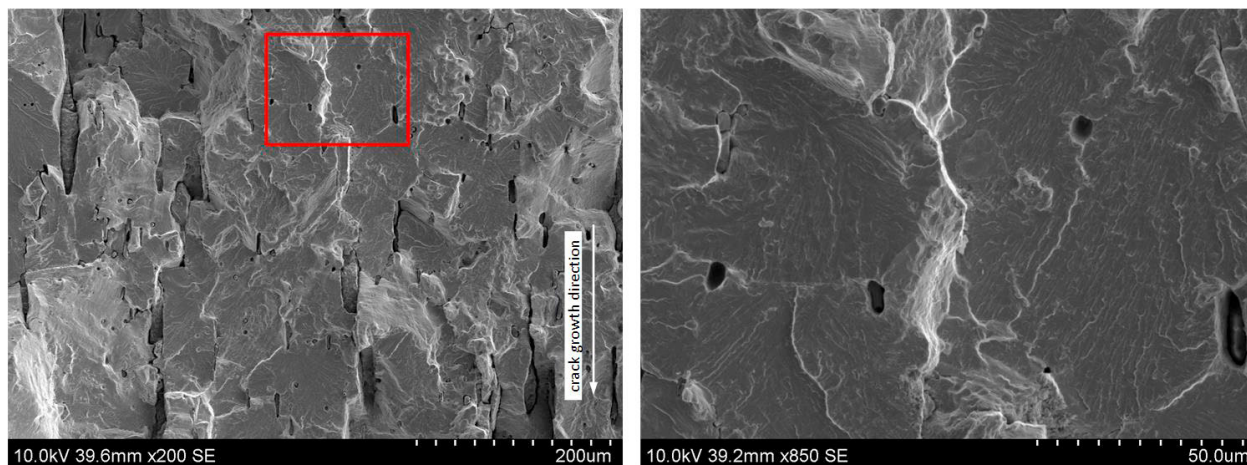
The final stage of the fracture surface of the tested specimen $R=0.05$; macro-view (on the left), enlarged fracture area marked by frame (on the right)
